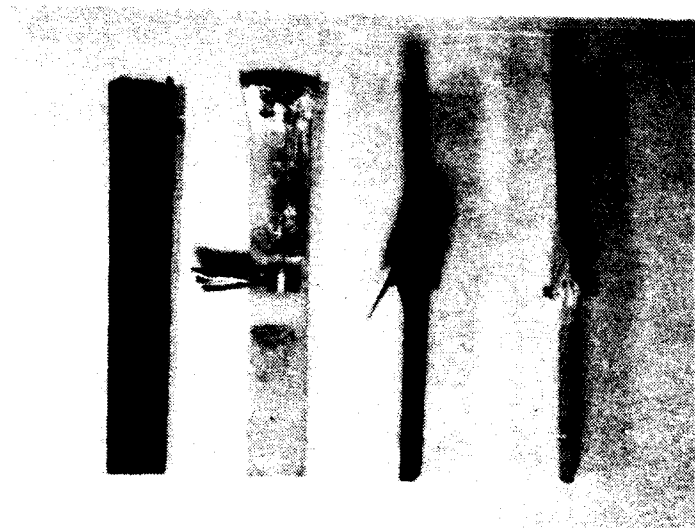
Typical Failures of Wyoming End-Loaded, Side-Supported Compression Test Specimens [25]
